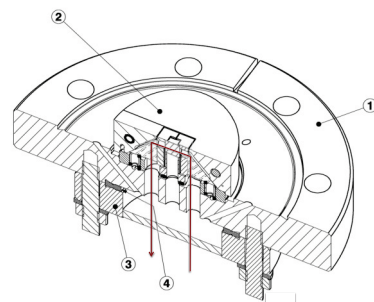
Laser beam trace inside the eo pick-up: 1. Flange. 2. Button. 3. Viewing port. 4. Copper gasket.
